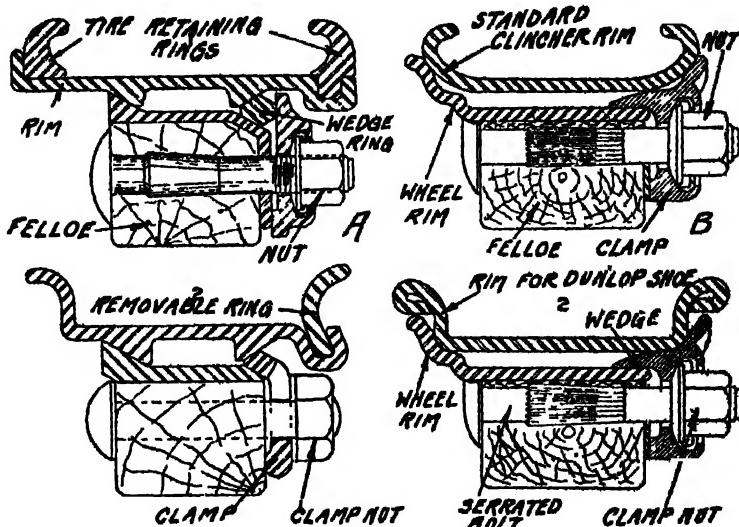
Sectional Views, Showing Construction of Quick Detachable Demountable Rims.
